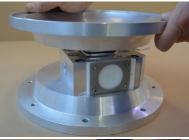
Take out pin screws [14] and take care of the bushings [1204E]
